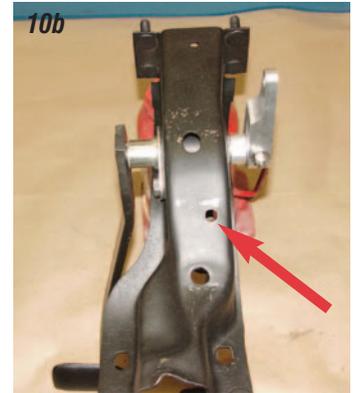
, 10b & 10c: Using the bracket as a guide, drill the second 3/8" hole in the pedal assembly and bolt the bracket in place.
